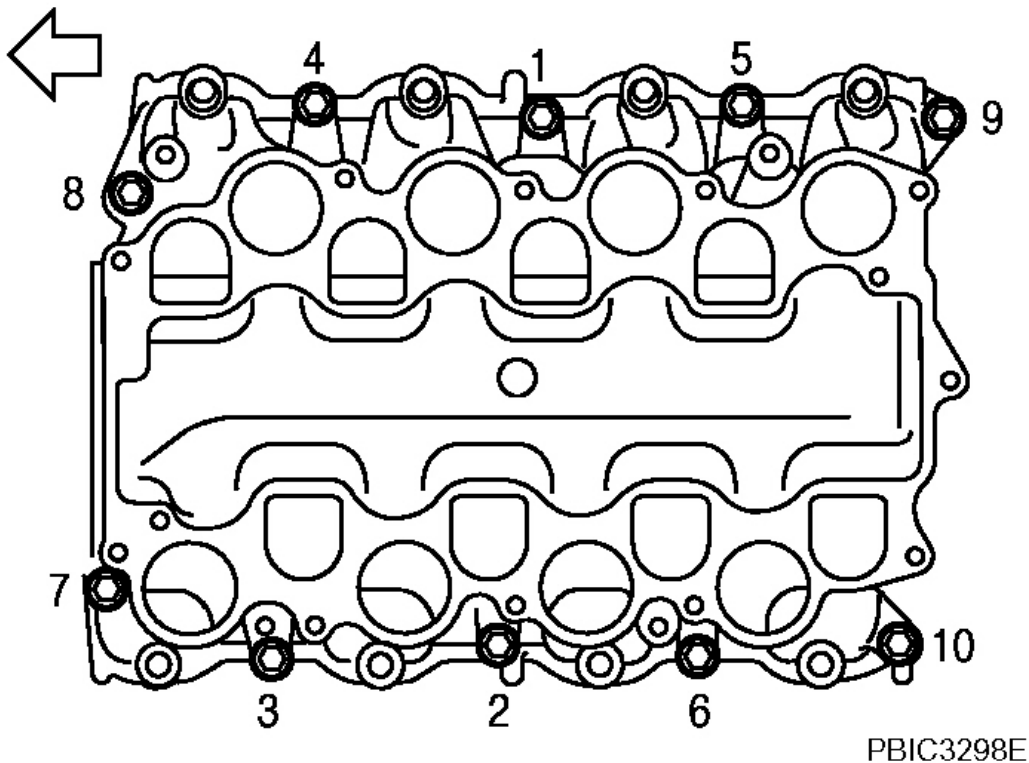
Identifying Loosening Mounting Bolts In Sequence
